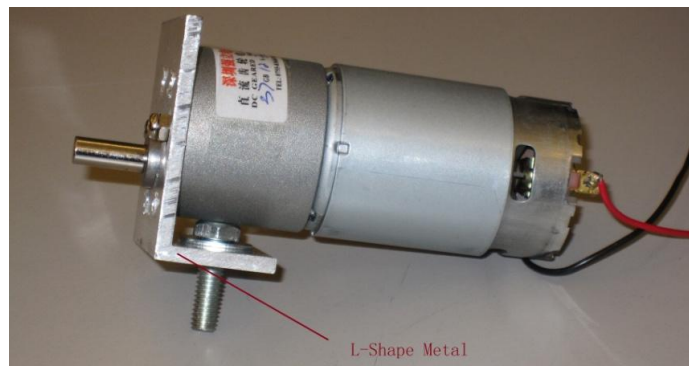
Picture of Gear Motor Mounted on L-shape Metal
